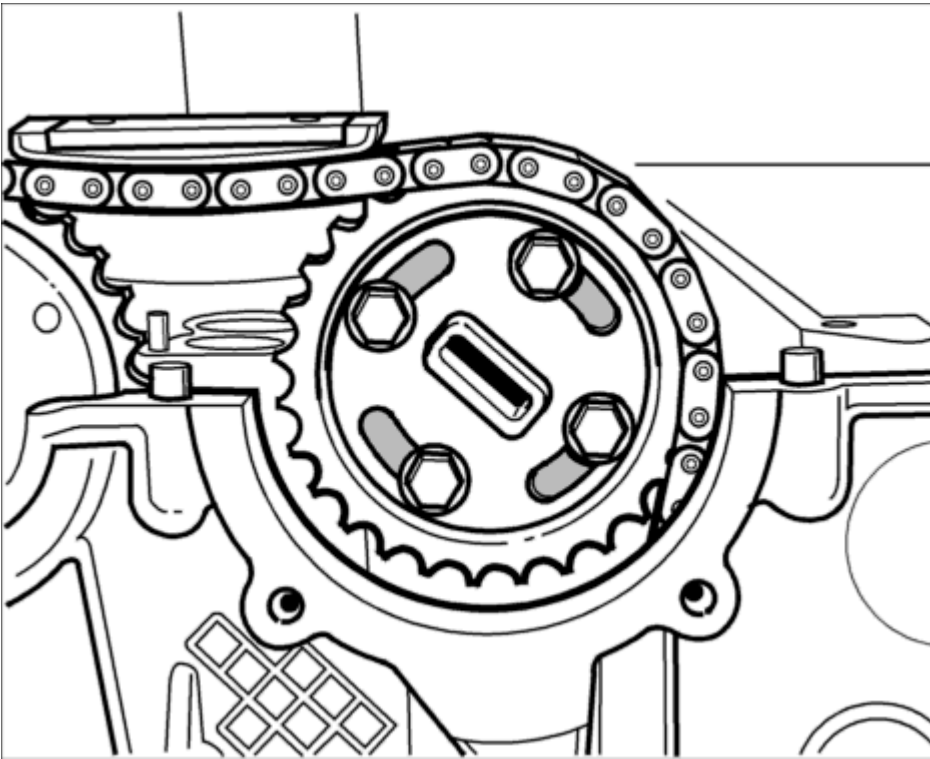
Exhaust sprocket 1 - 3, all screws fitted
